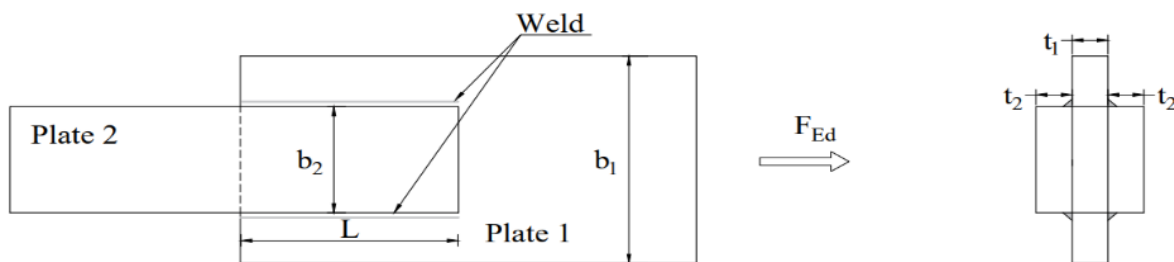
Geometric configuration of fillet weld longitudinal weld.
